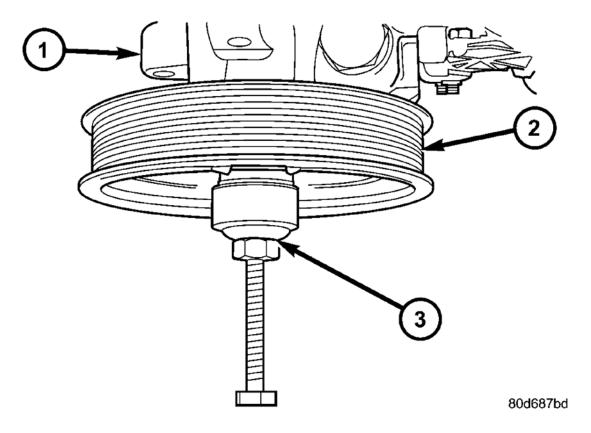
Identifying Pump, Pulley & Installation Tool Courtesy of CHRYSLER LLC
